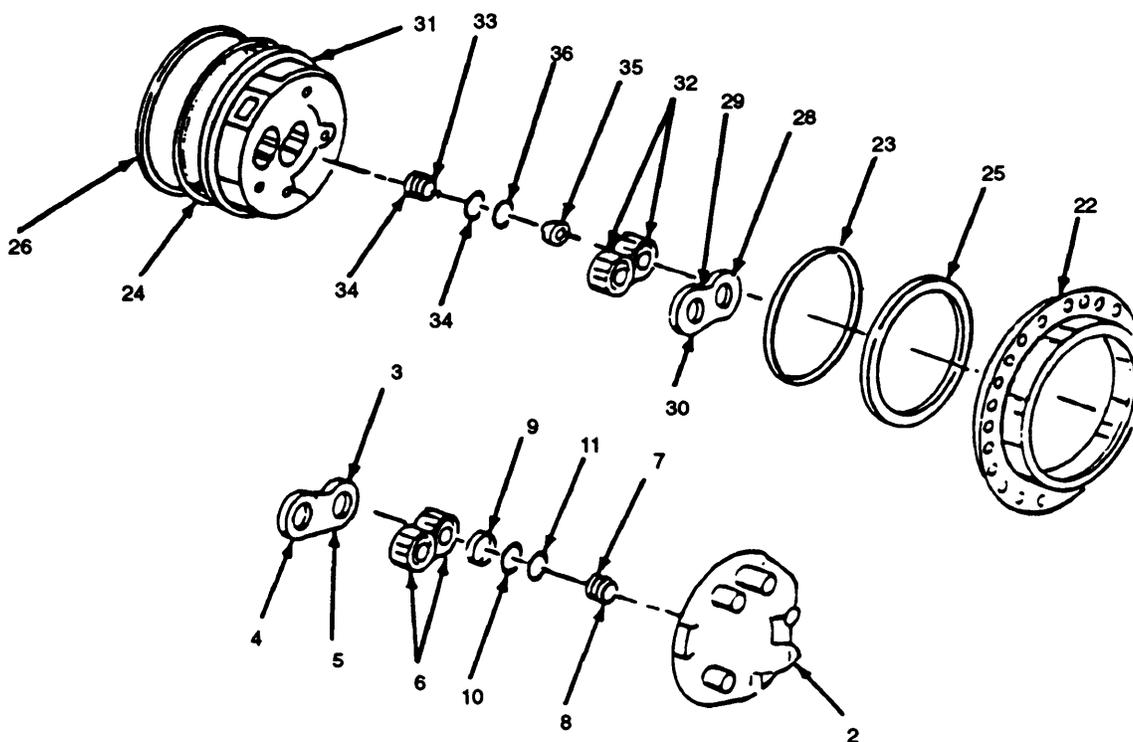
Winch Motor, Reassembly (Sheet 1 of 2).
